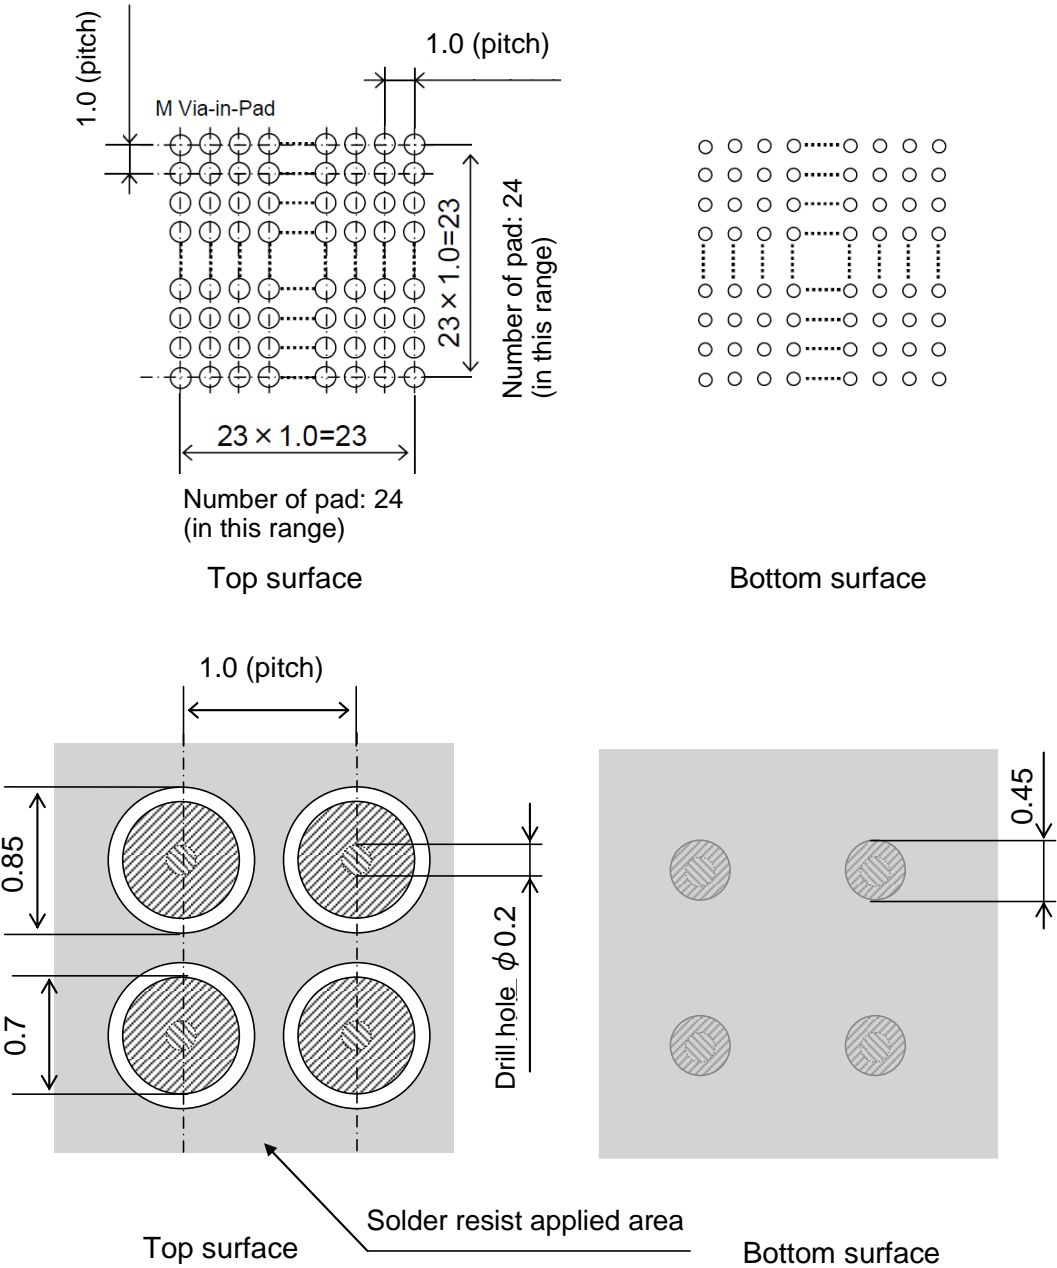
Test Coupon (Example of BGA pads) (8/8)
